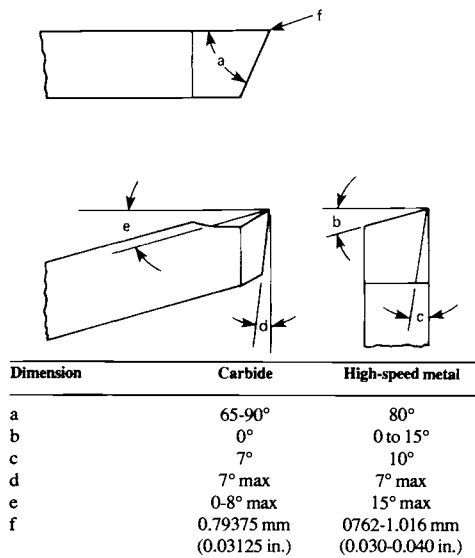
Recommended shapes for carbide and high-speed steel cutting tools used in machining sprayed metal coatings
